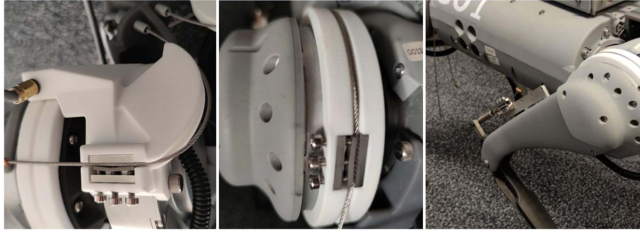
Installation of the spring engaging mechanism: left is for the hip joint, middle the thigh joint, and right the calf joint.
